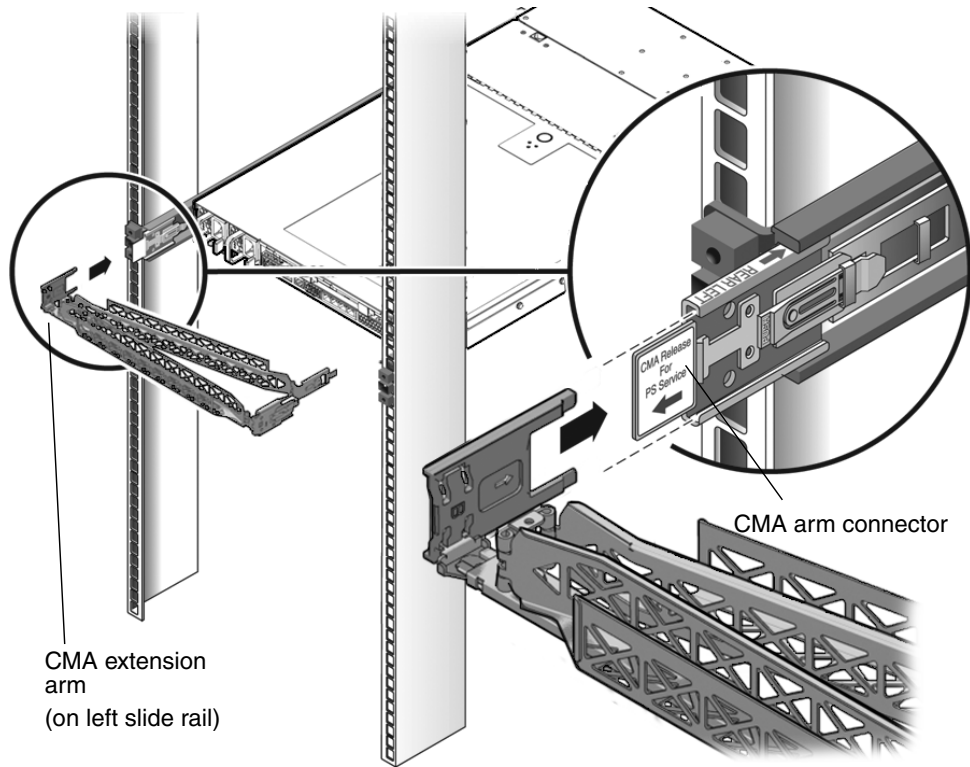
Inserting CMA Slide-Rail Connector Into the Back of the Right Slide-Rail Assembly
